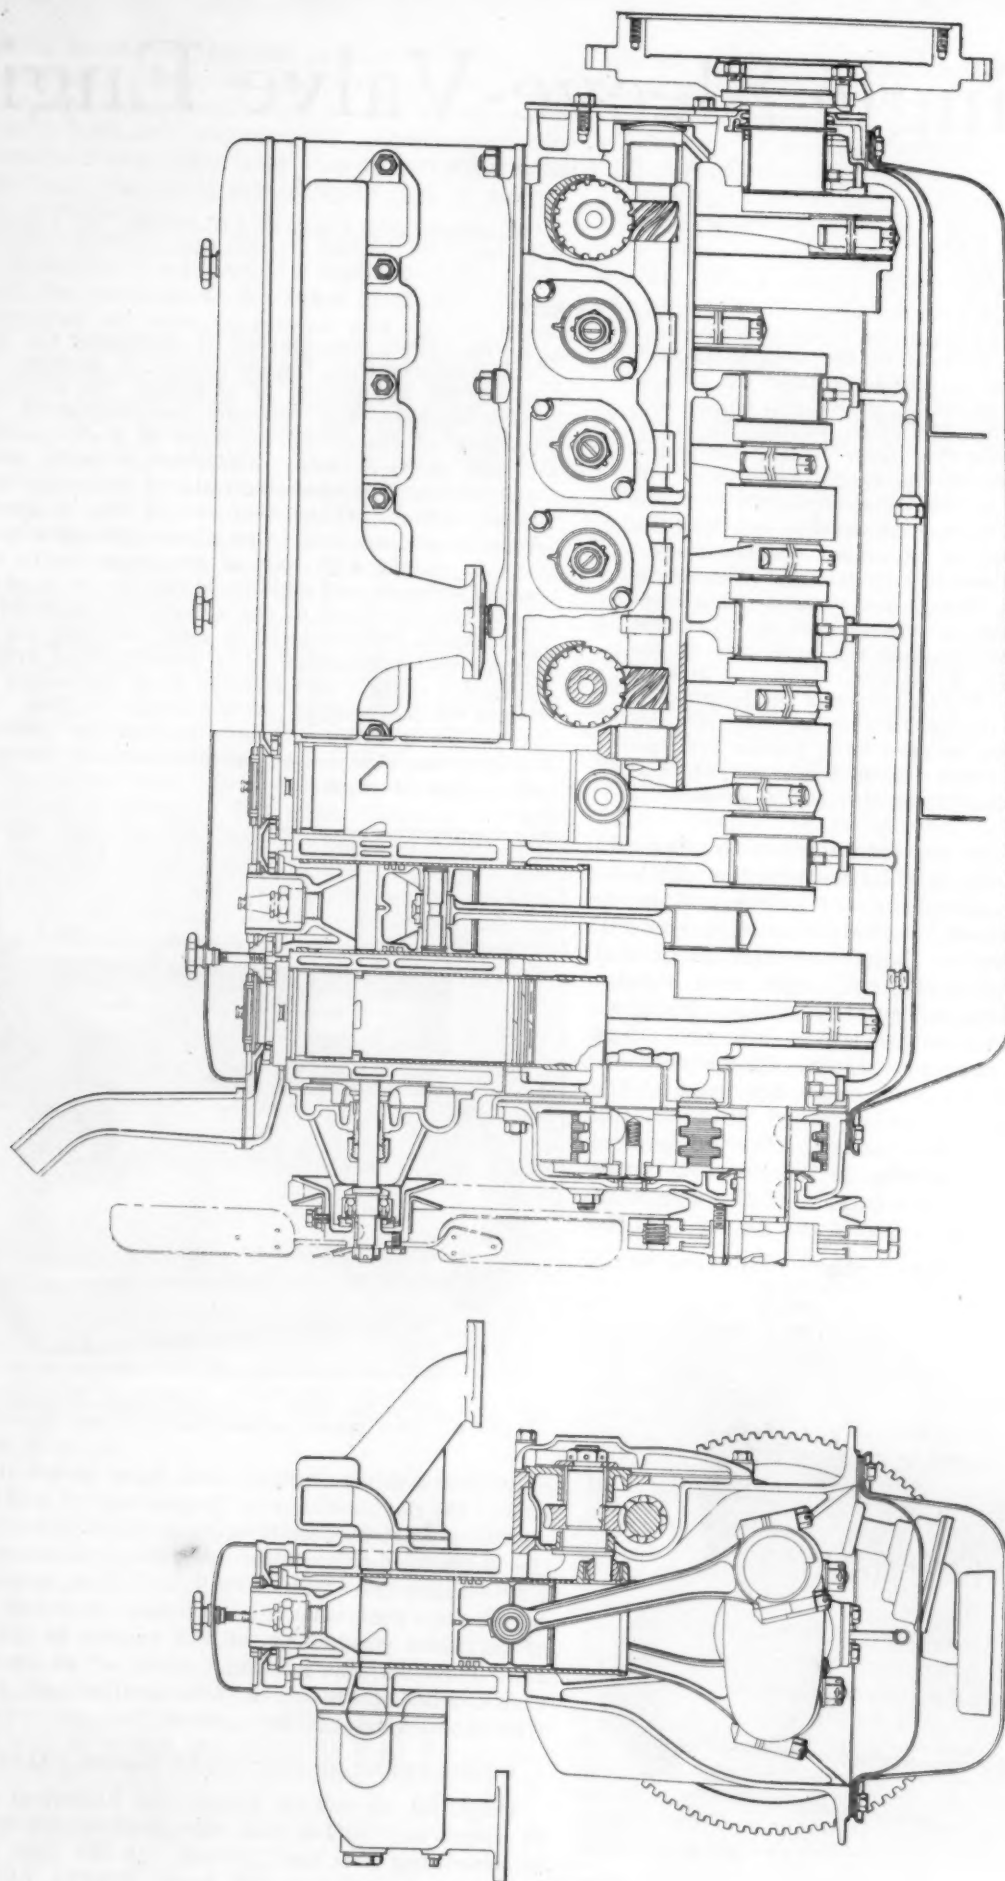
CROSS-SECTIONAL VIEW OF SINGLE-SLEEVE-VALVE ENGINE. The Crankshaft, Connecting-Rod and Piston Are of Conventional Design. The Essential Difference Lies in Substituting a Single Valve of Cylindrical Form for the Usual Poppet-Valves
